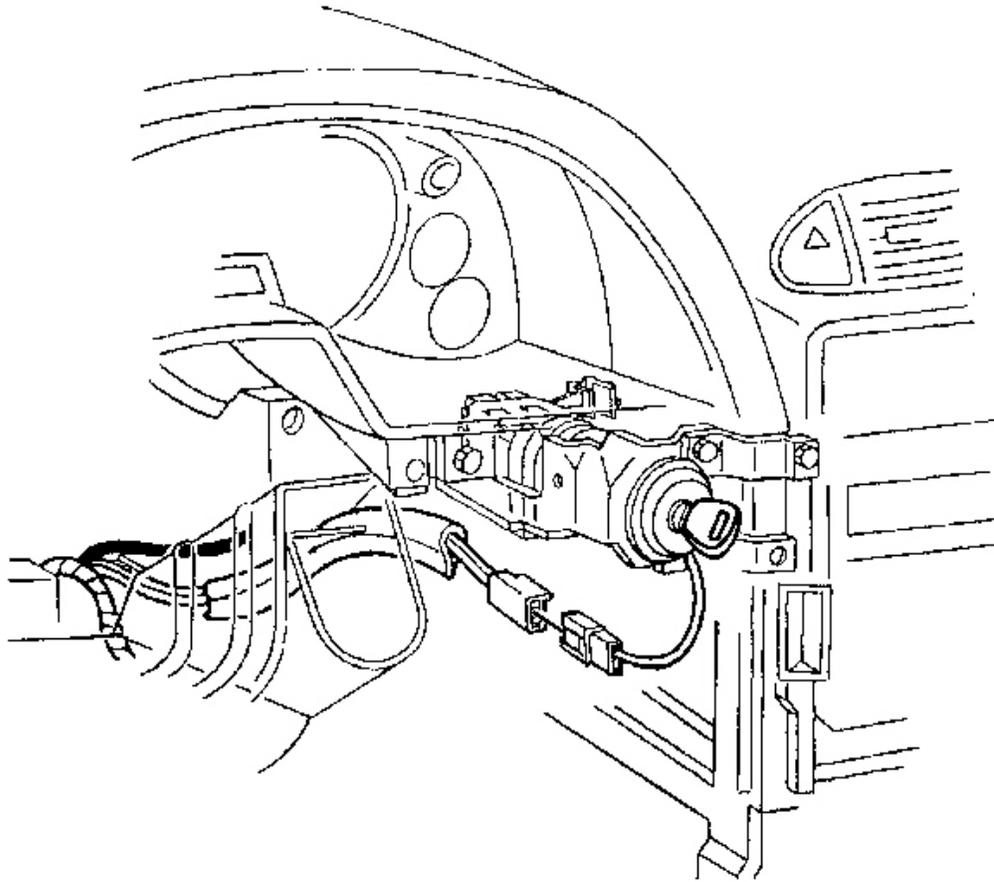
Lock Cylinder Electrical Connector & Ignition Switch Bezel
